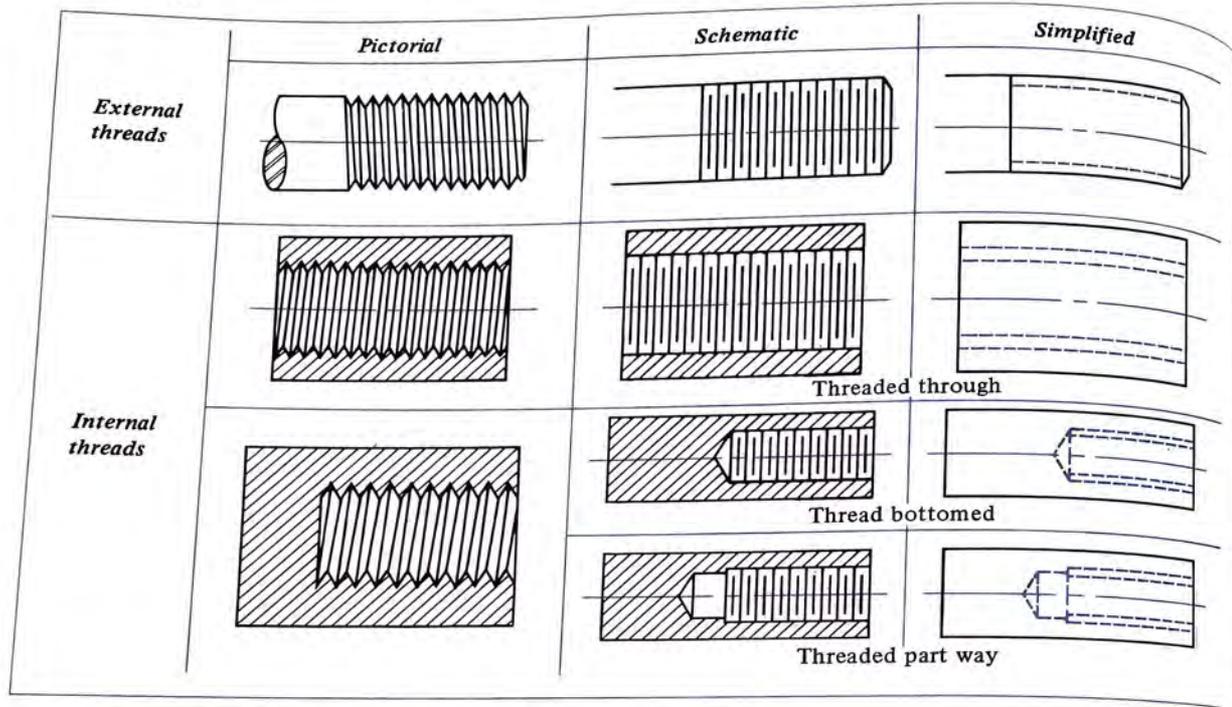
Techniques for Representing Threads on a Drawing
